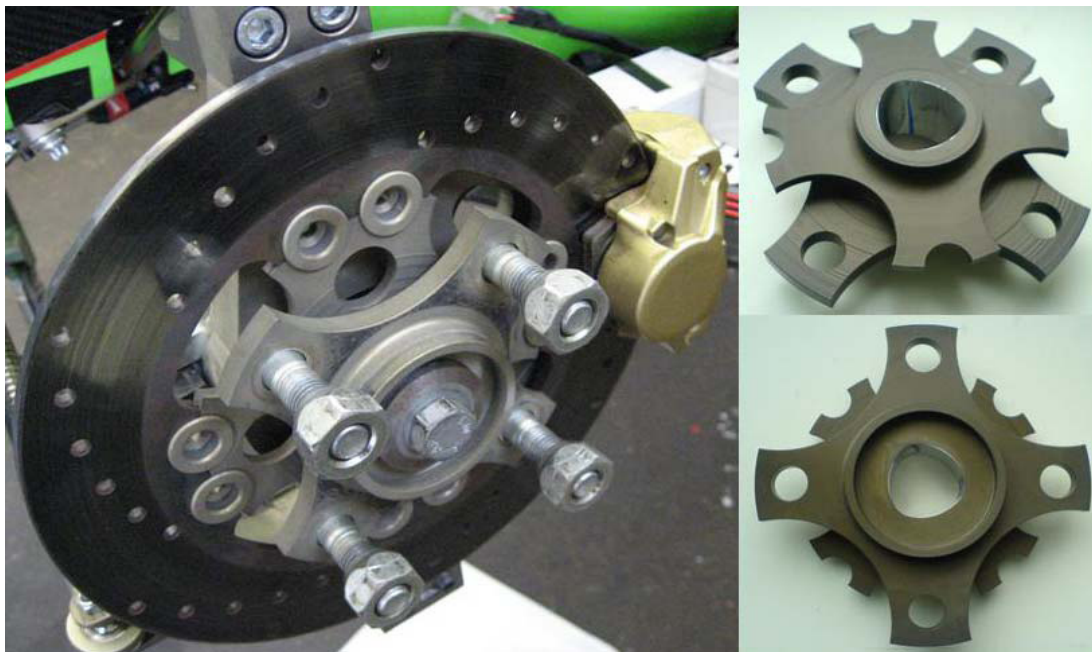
Integration of the disk inner ring into the wheel hub - BRC08 [6]
